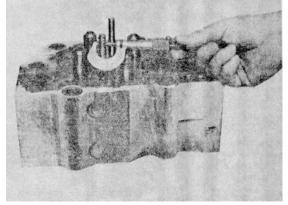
6D-8. Measure the Crosshead Guide Outside Diameter
